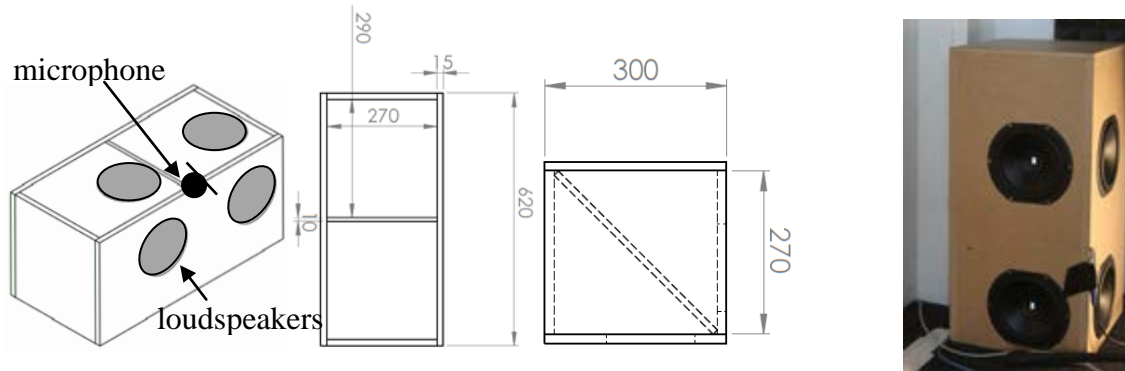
left: drawings of the electroacoustic absorber prototype (isometric view, face cut, top cut); right: picture of a built prototype
